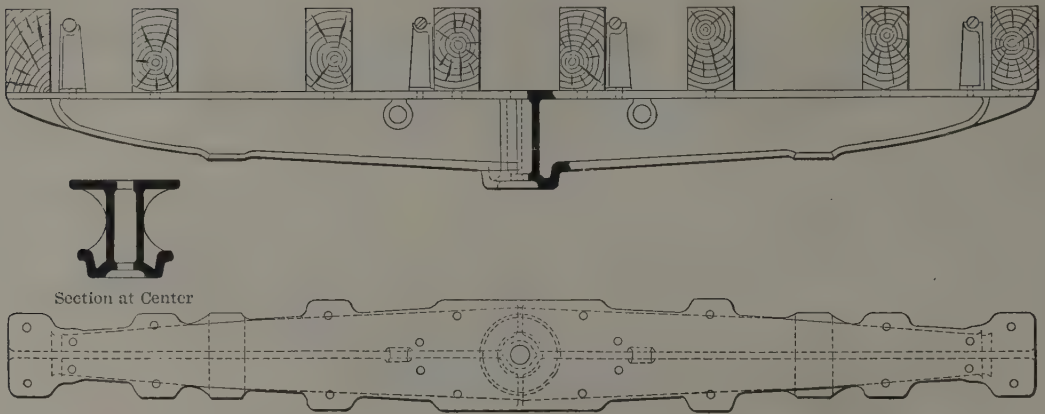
Cast Steel I-Section Body Bolster. American Steel Foundries.
